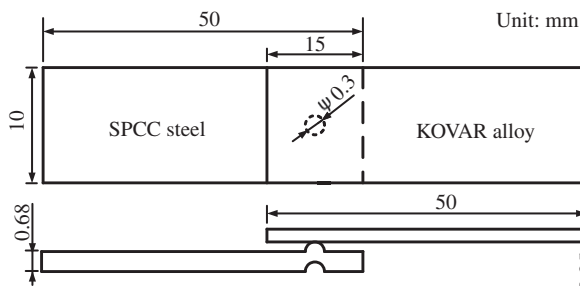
Schematic illustration of the lap-joint geometry of welded sheets.
